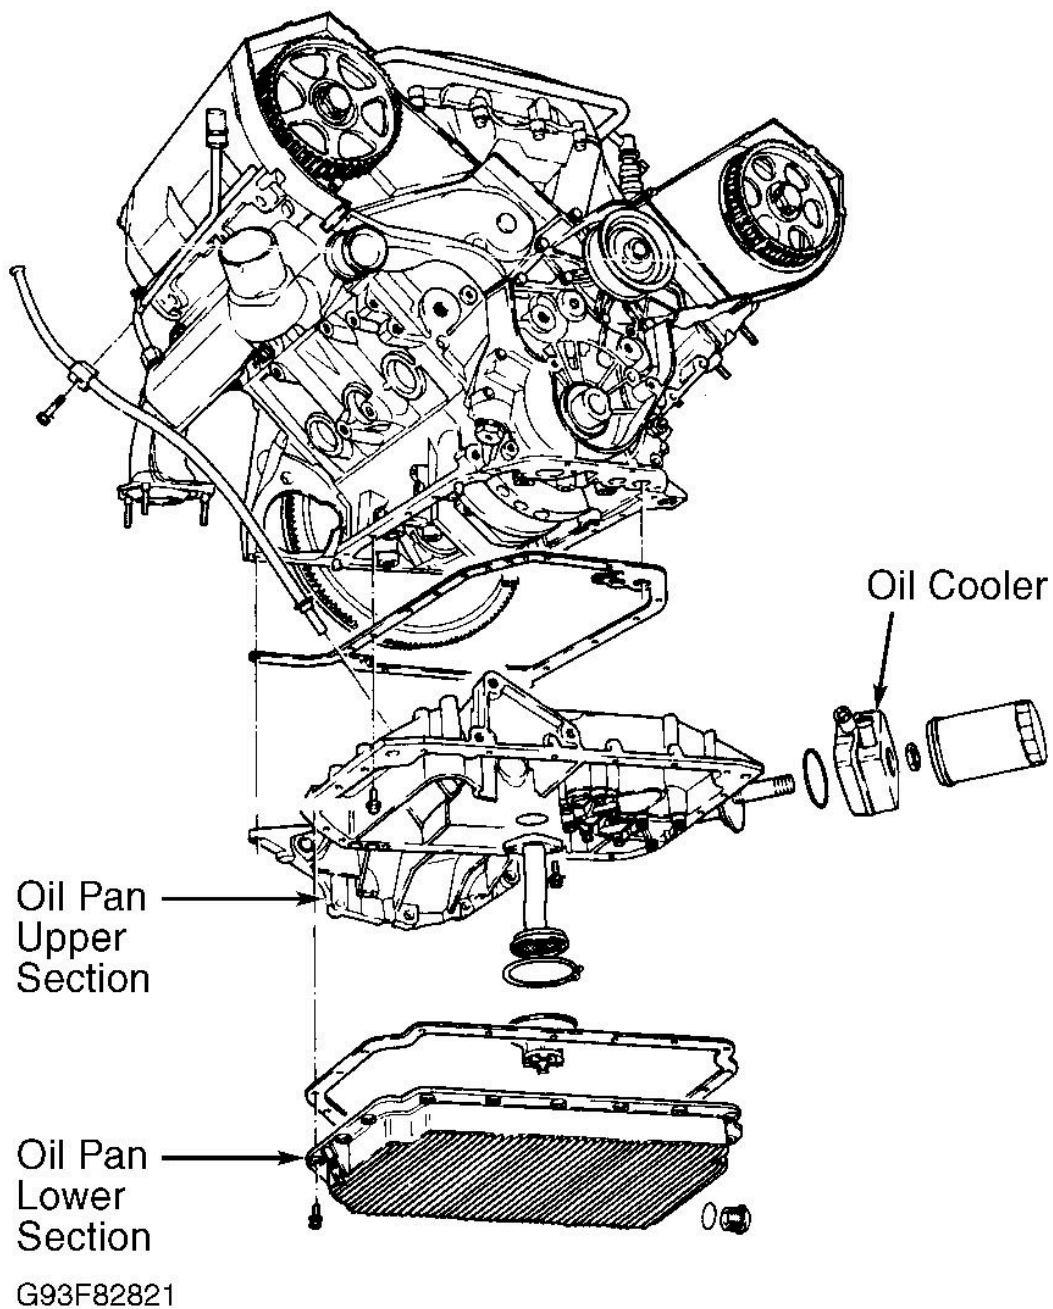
Removing & Installing Oil Pan Upper & Lower Sections
